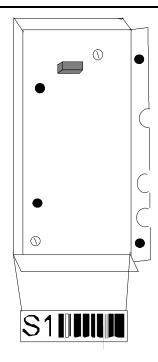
Applying Bar Code Labels to the Platen Extension Assembly
